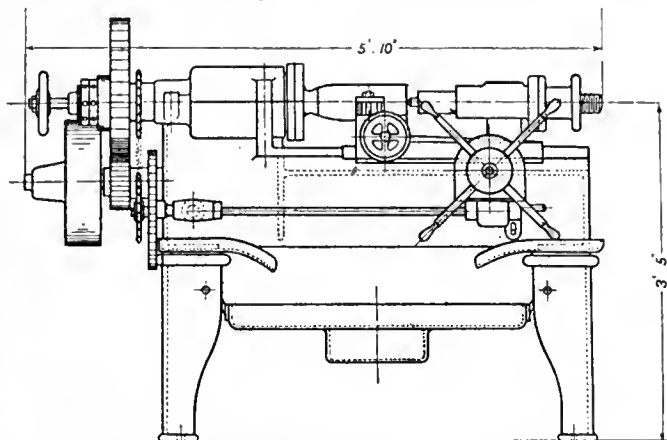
TURNING LATHE FOR 4.5 IN. SHELLS.
